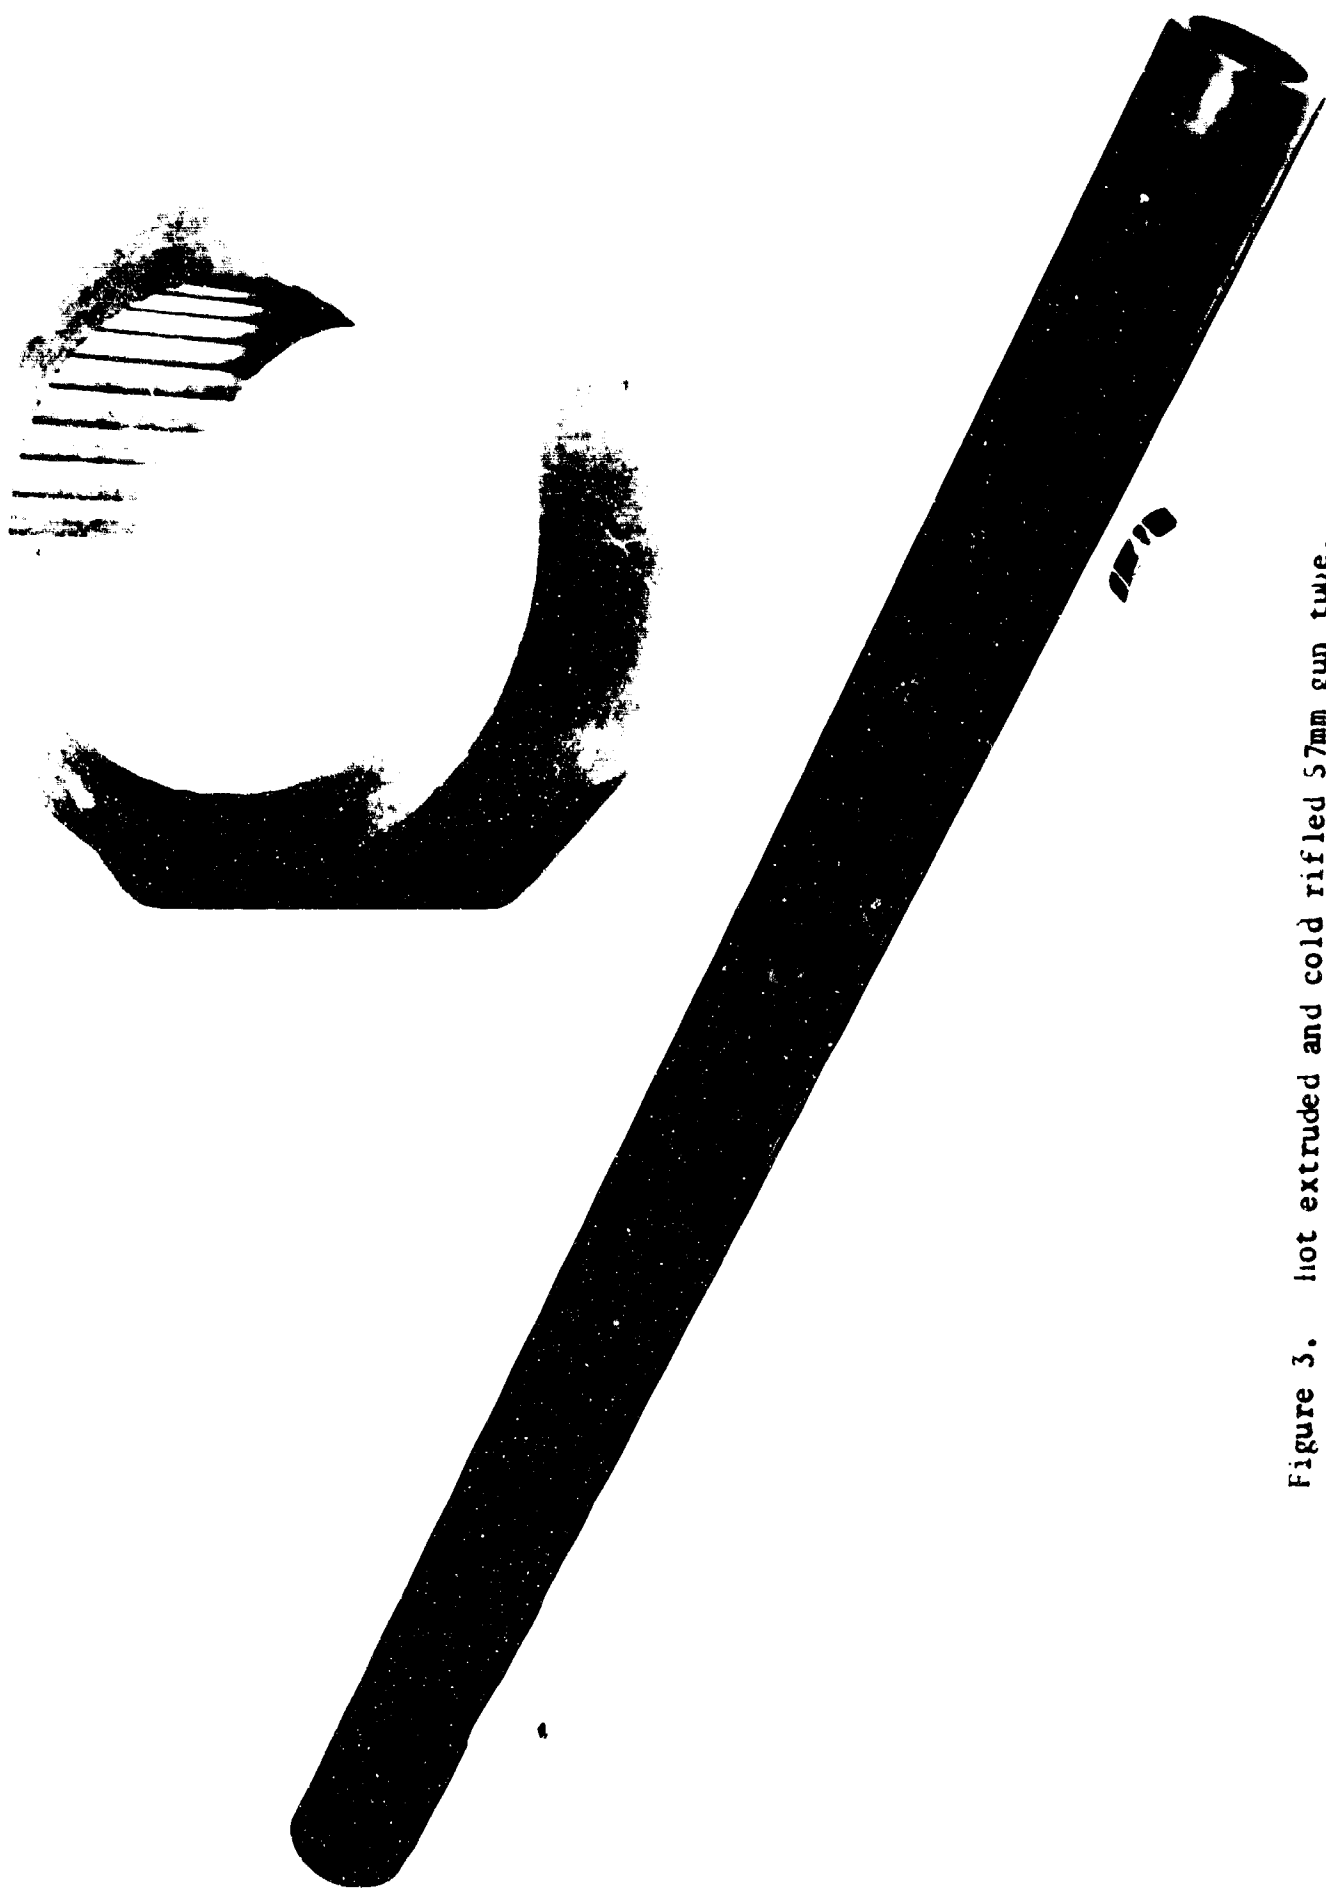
Hot extruded and cold rifled 57mm gun tube.
